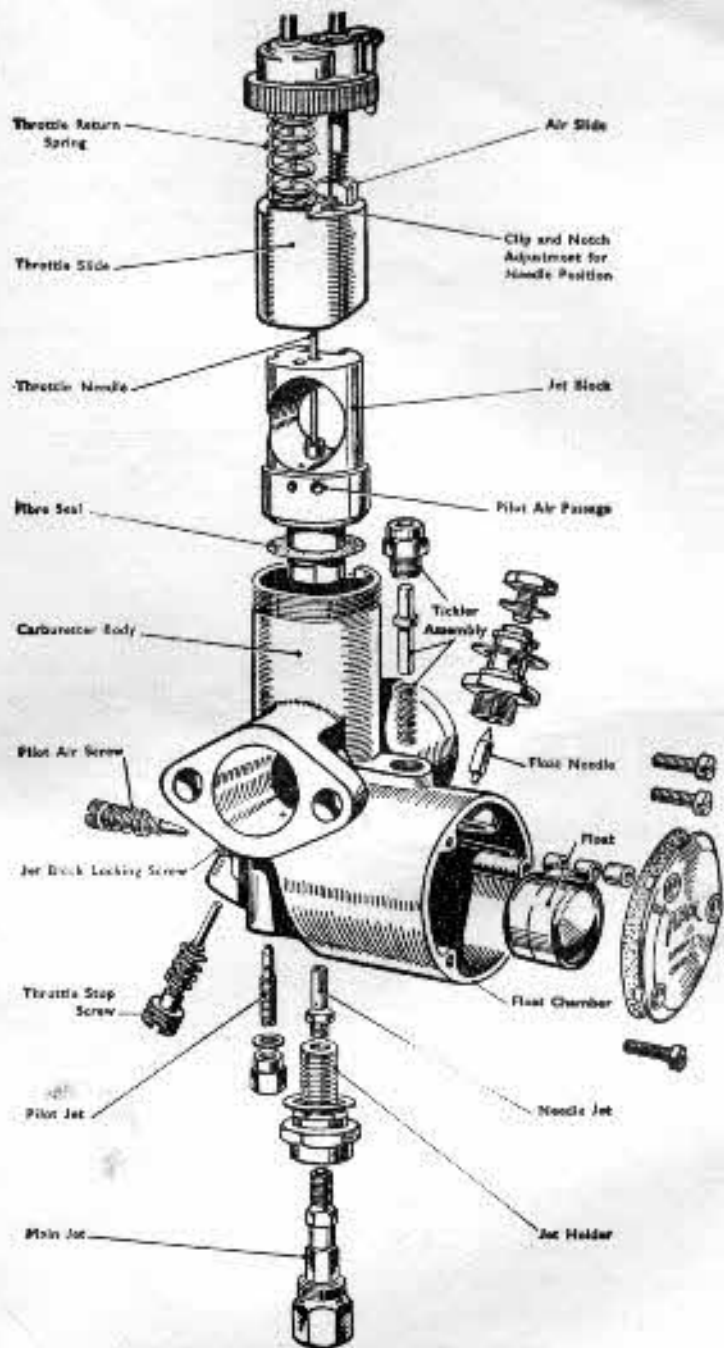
AMAL 'MONOBLOC' CARBURER
